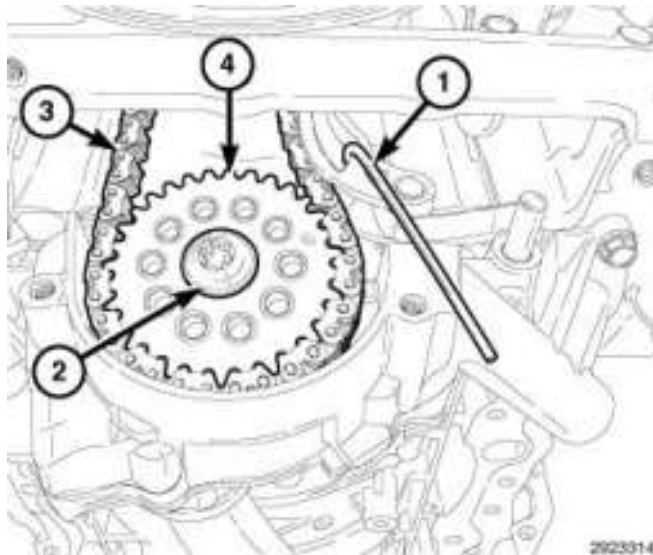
Retaining Pin, Retaining Bolt, Oil Pump Chain & Sprocket
